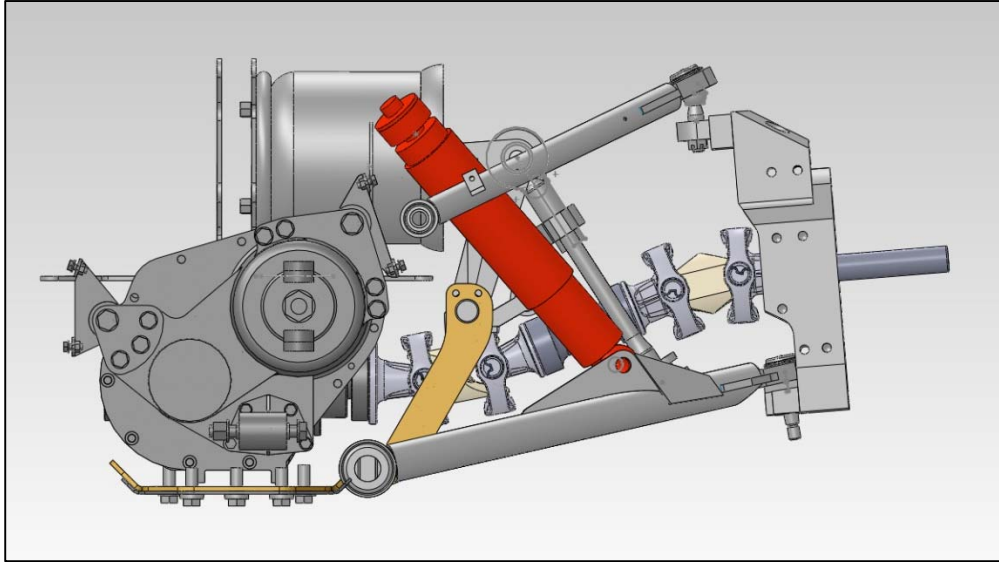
Side View (Bump-Stop Height, 0° Steering Angle)
